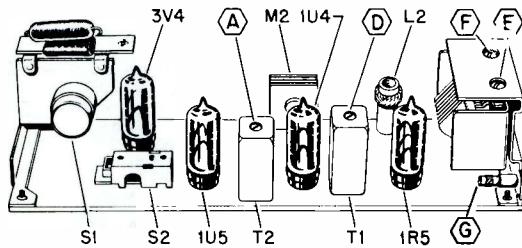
Top View of Chassis 200. Tube Locations and Alignment Points Shown.
